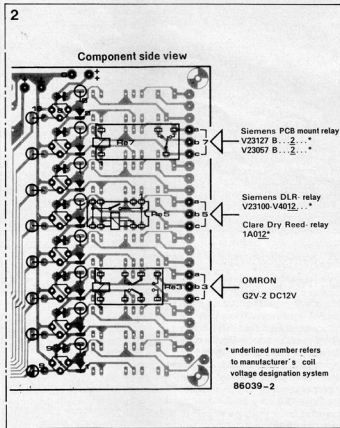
Showing how different types of PCB-mount relays may be fitted onto the board.
